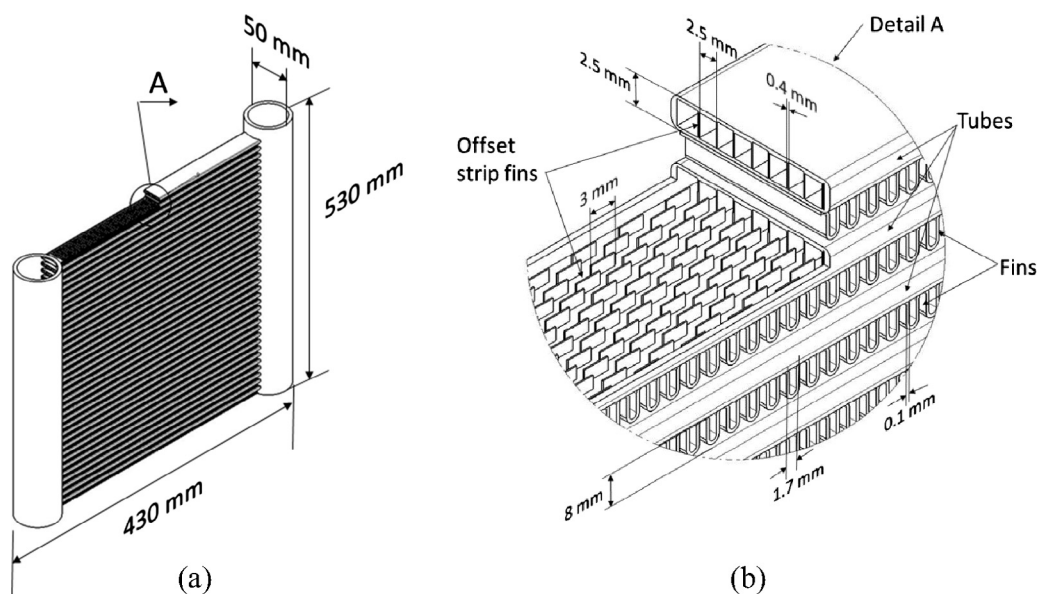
Stock microchannel aluminum oil cooler with plain fins on the air side and offset strip fins on the oil side: (a) overall dimensions, (b) microchannel detail.
